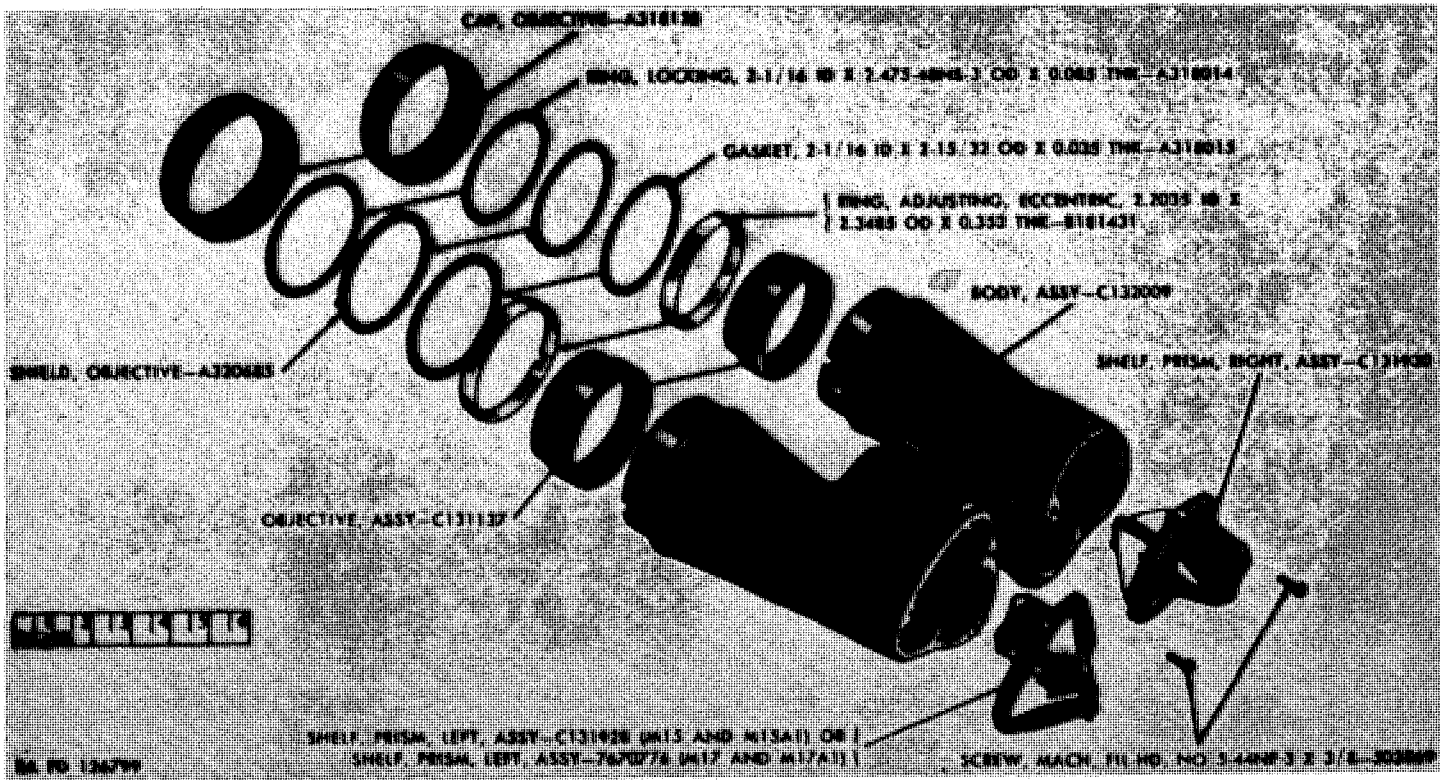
Binocular M15, M15A1, M17 or M17A1 — partial exploded view.
